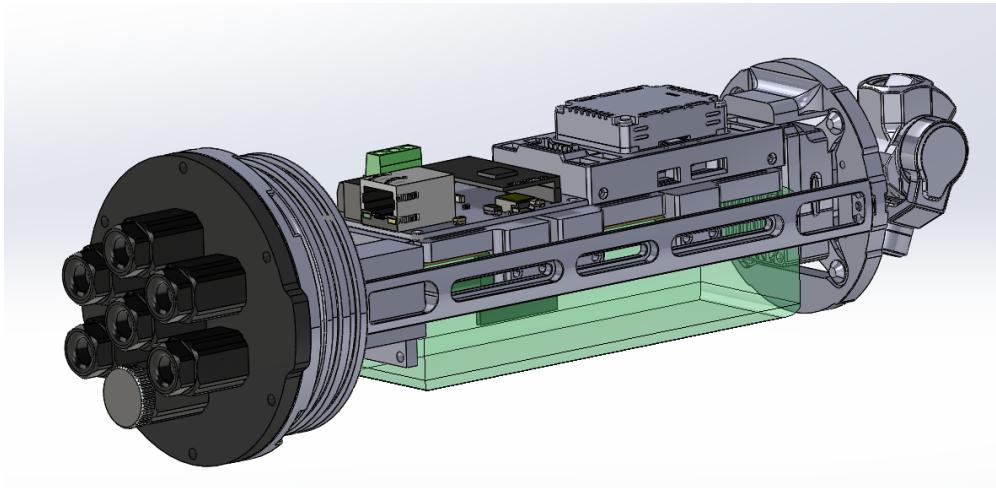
Final design from phase 1 of the the water tight enclosure with the blue robotics 3" diameter product. This includes the new camera mount and handle added from design 3. Technical Drawings with dimensions can be found in the appendix.
